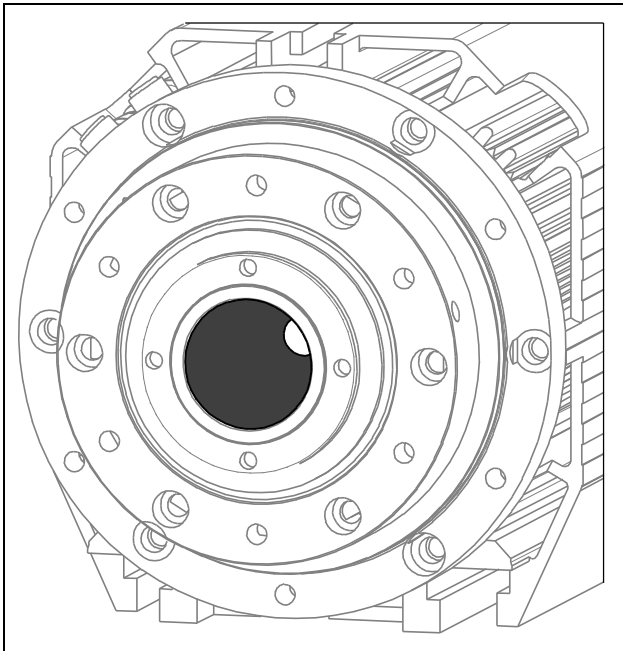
Conical surface of ISO 30 spindle shaft (in black)
